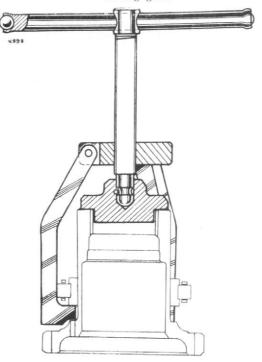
Extractor T.77743 for drawing the inner roller race clear of the upper driving gear.
